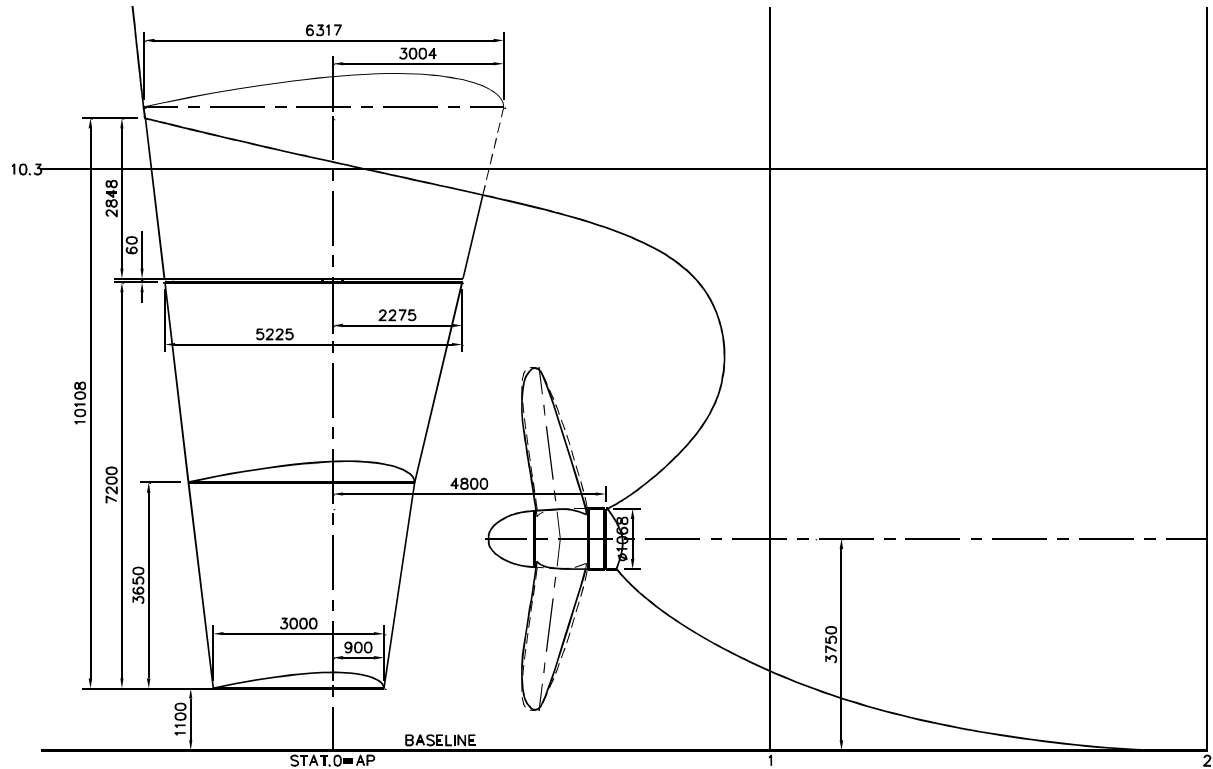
Drawing of the HTC rudder, $T=10.3$ m, dimensions in mm
